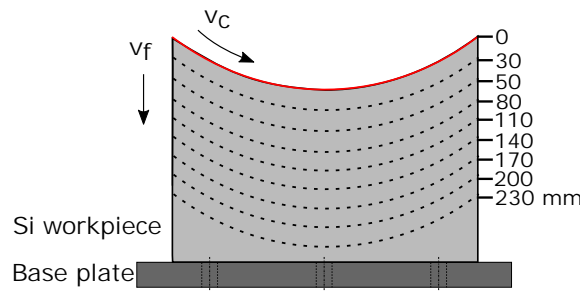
Sampling points along the wheel depth over the silicon workpiece.
